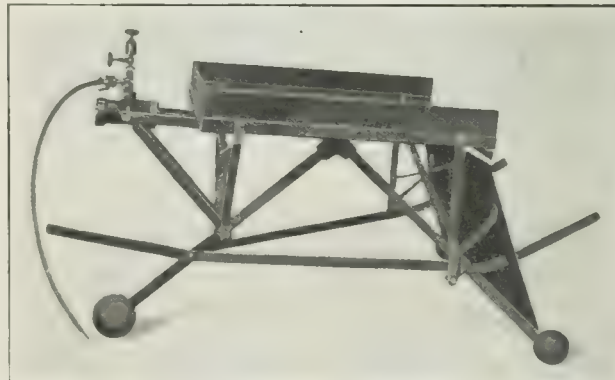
A Large Tripod Shaker Made by the Hanna Engineering Works, Chicago, Ill.
